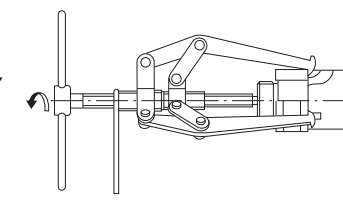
Removal of Inner Ring Using Withdrawal Tool (2)
